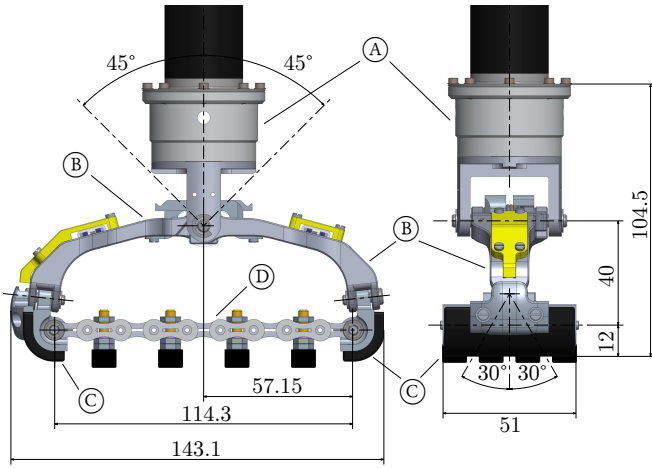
CAD of the main components and dimensions of SoftFoot-Q.
